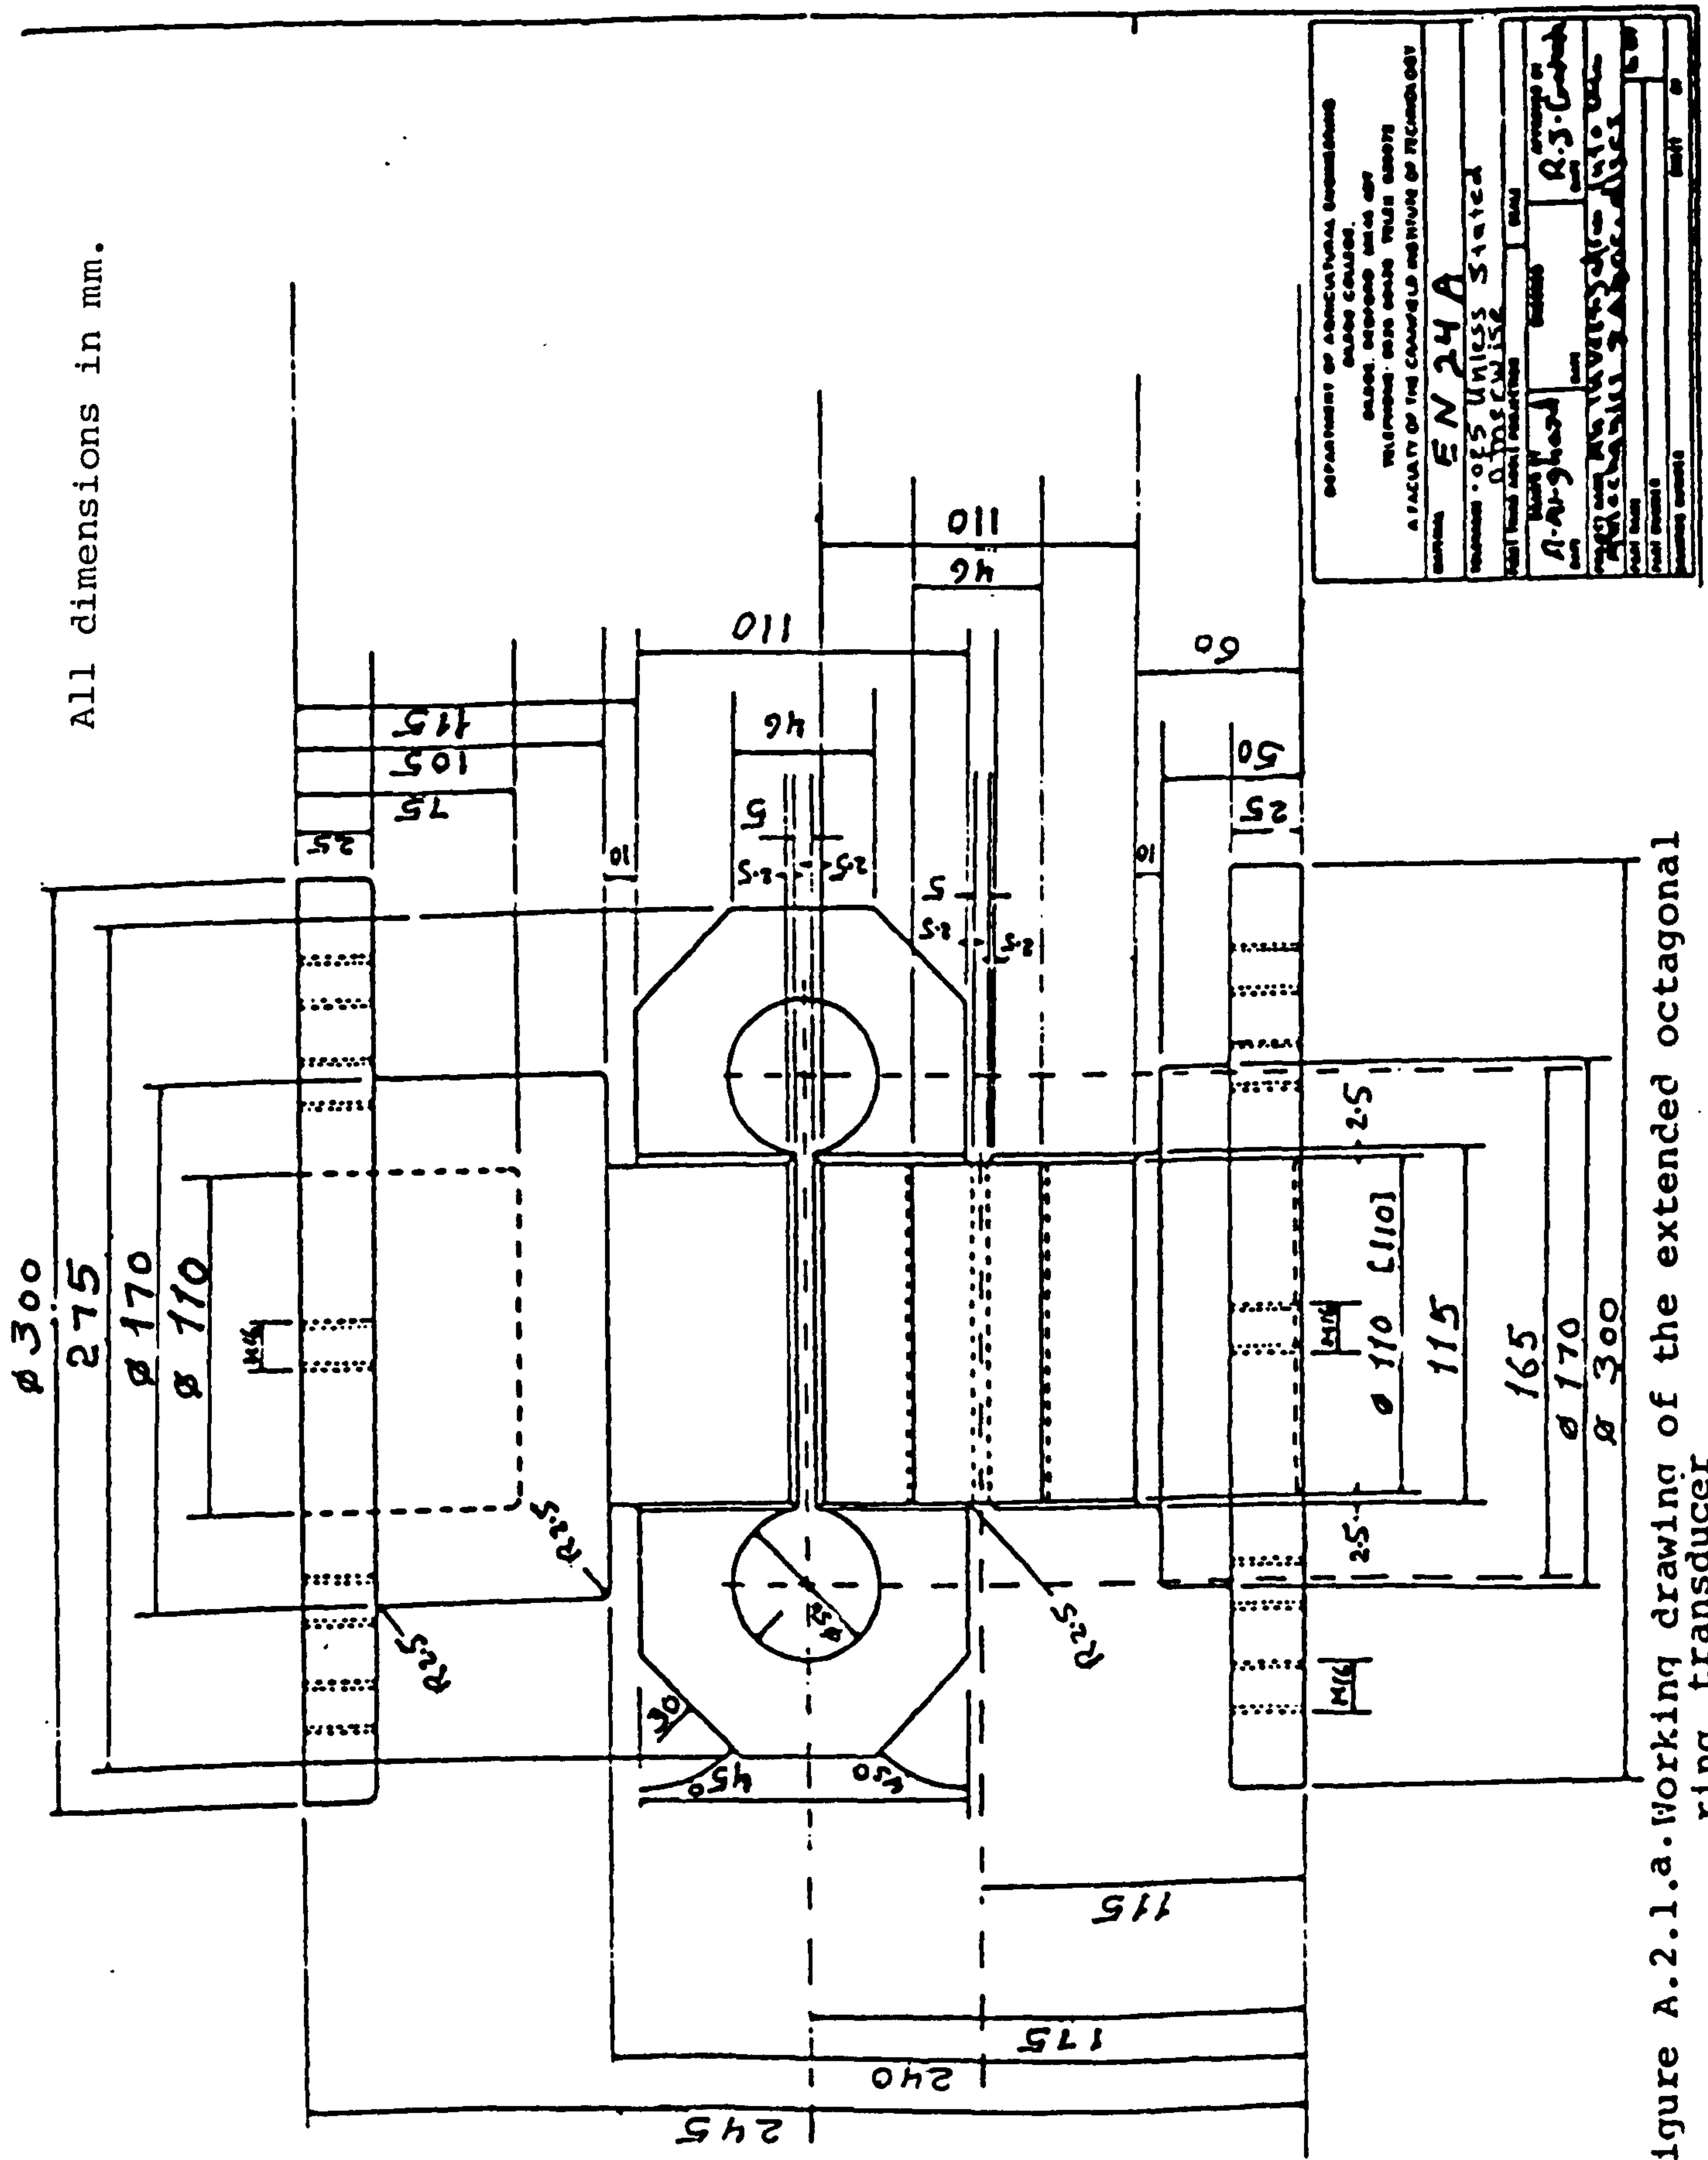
a. Working drawing of the extended octagonal ring transducer
